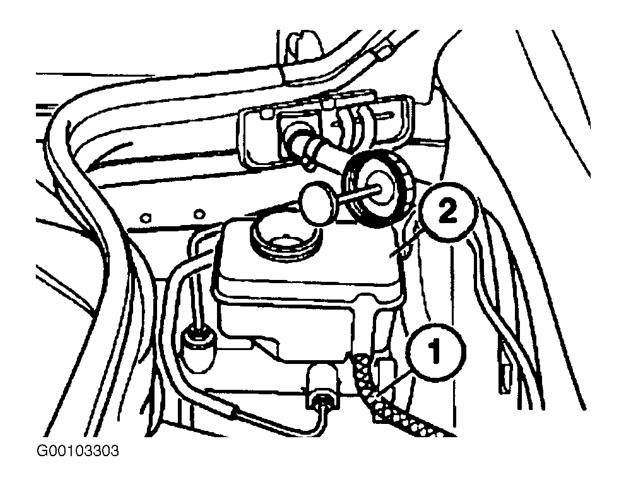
Locating Supply Hose Of Clutch Hydraulic System Courtesy of BMW OF NORTH AMERICA, INC.
